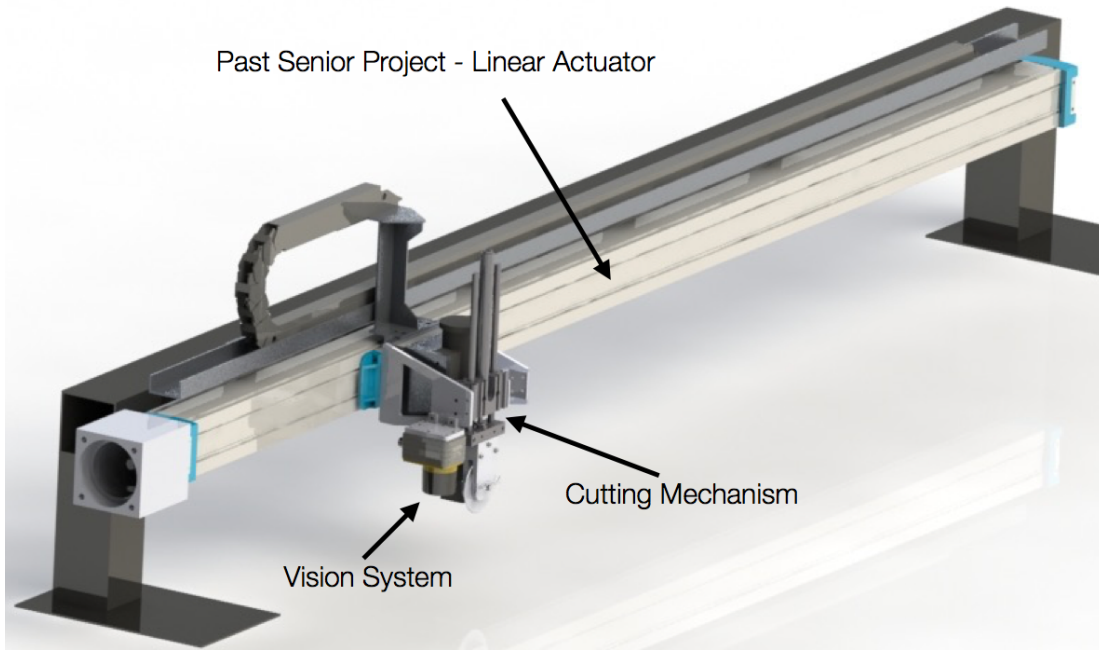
Complete Assembly of Proposed Design (featuring Cutting Mechanism Option 1)
